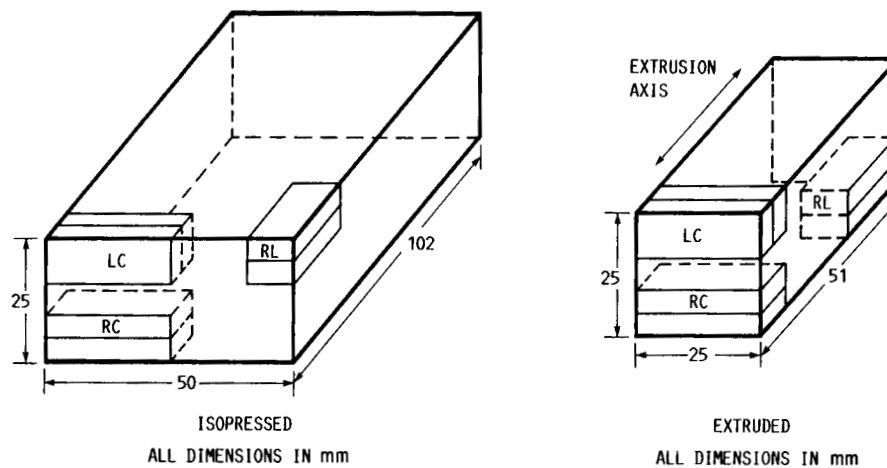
TEST SPECIMEN REMOVAL PATTERN FROM THE PROCESSED BLANKS OF THE ALUMINAS.
